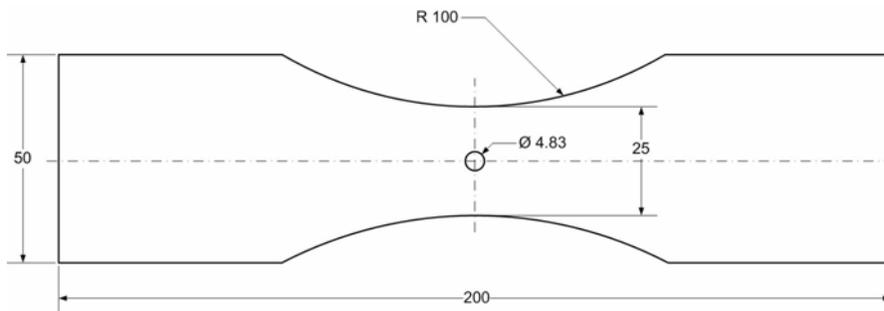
Open hole specimen in thin sheet (Laser Shock Peening)
